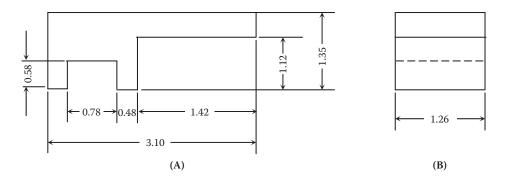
Size dimensions: (A) view with two size dimensions; (B) third side dimension on this view.
